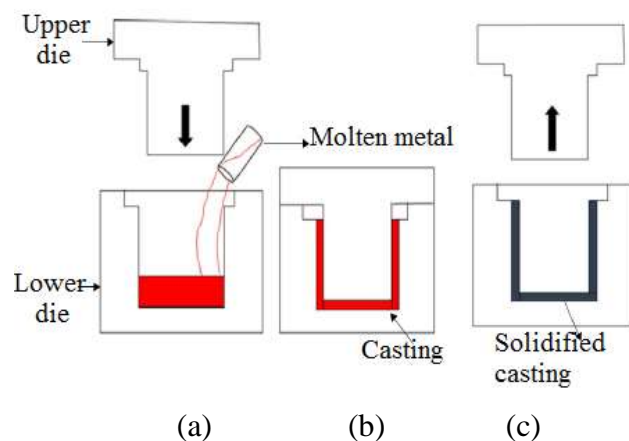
Schematic diagrams illustrating the sequence of steps involved in squeeze casting [20]: (a) Molten metal poured into the pre-heated die, (b) application of squeeze pressure and (c) solidified casting.
